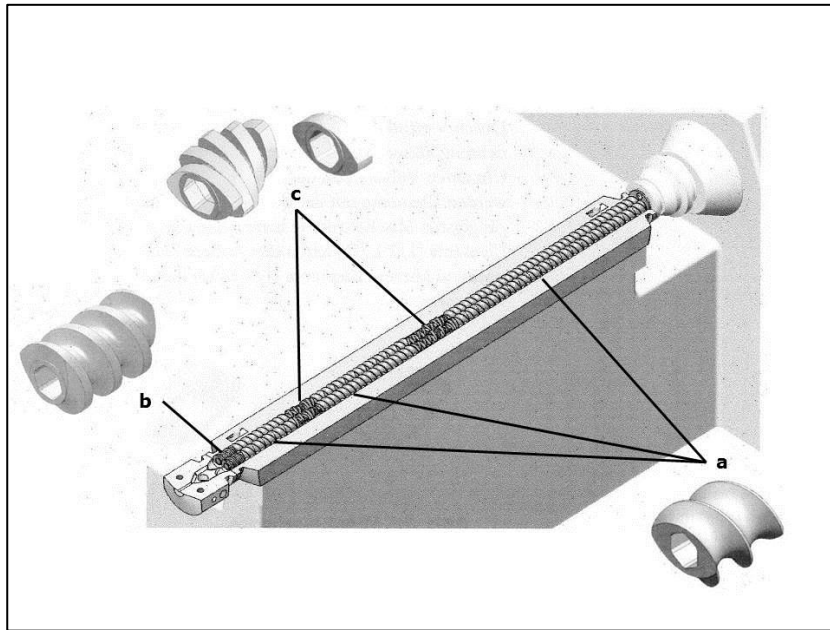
Applied standard screw design; a) forward conveying elements, b) discharge screw conveyors, c) kneading/mixing elements, on the right as a single element and on the left as a finished kneading/mixing zone block with its elements shifted between 30° and 60°, adapted from [117].
